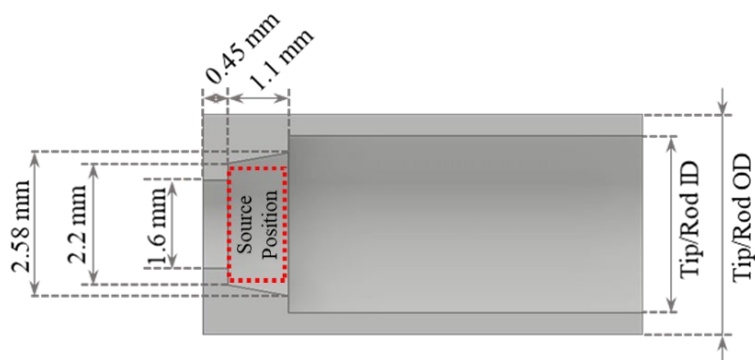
Drawing of the 3D printed rod tip. Each tip is placed on a rod and is held in place via interference. The source is located within a tapered cavity at the distal end of the tip.
